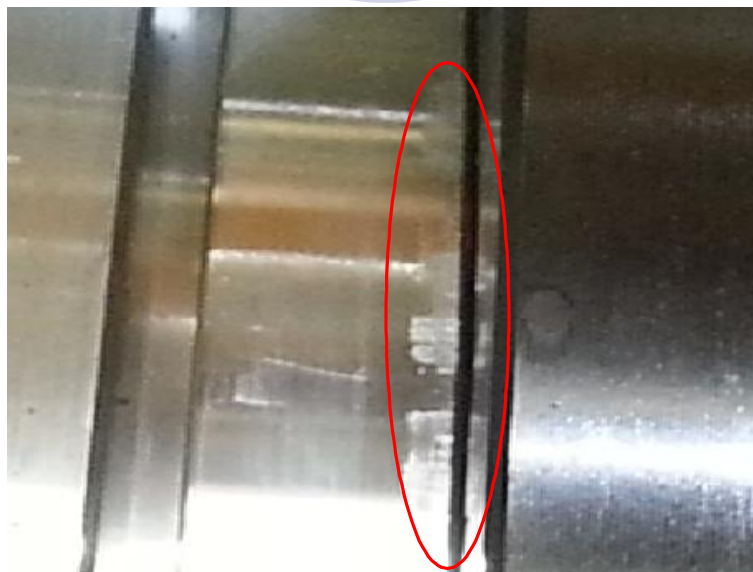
Detail of thrust plate contact marks⁵⁾
